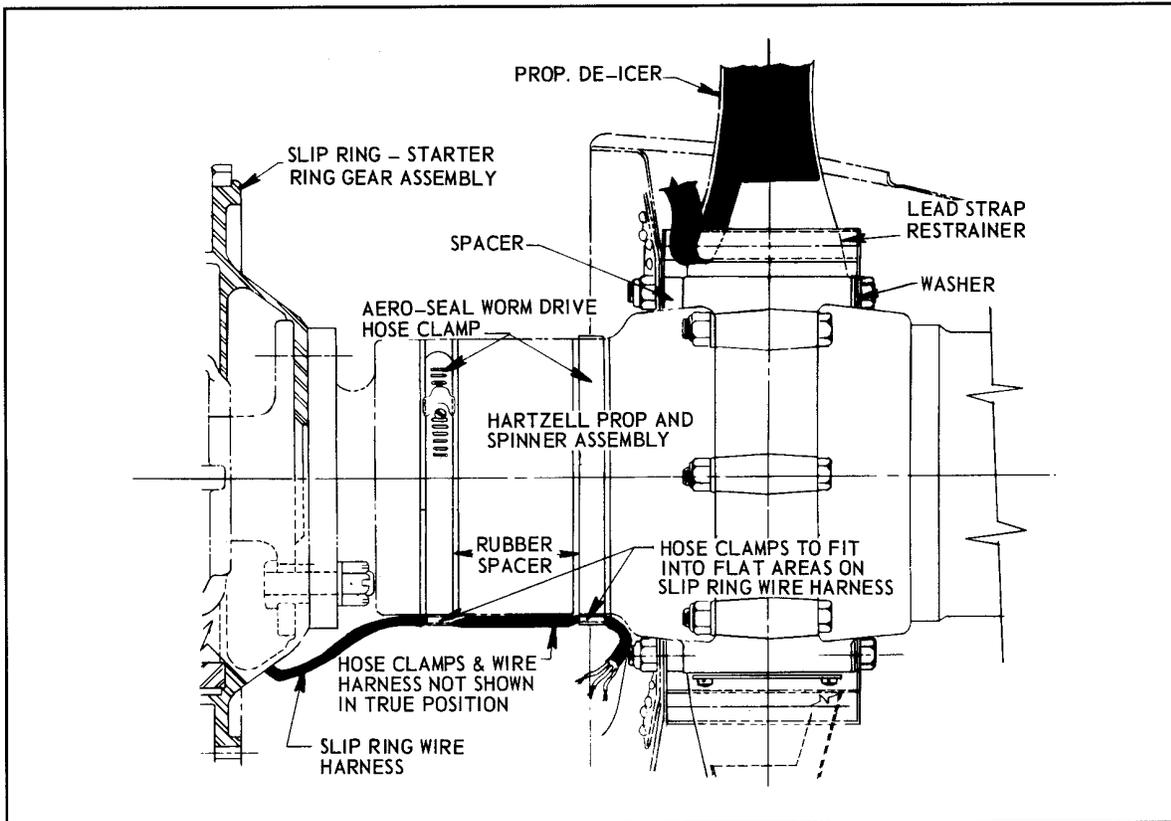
Slip Ring/Starter Ring Gear Assembly Installation
